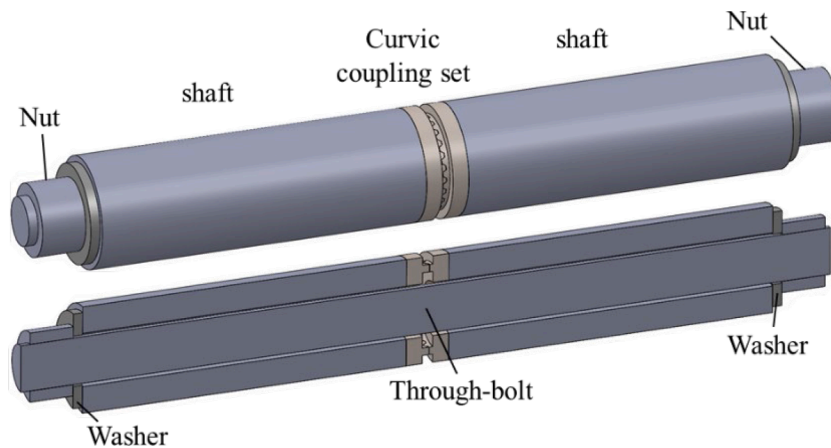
Test rotor assembly with Curvic coupling [4].
